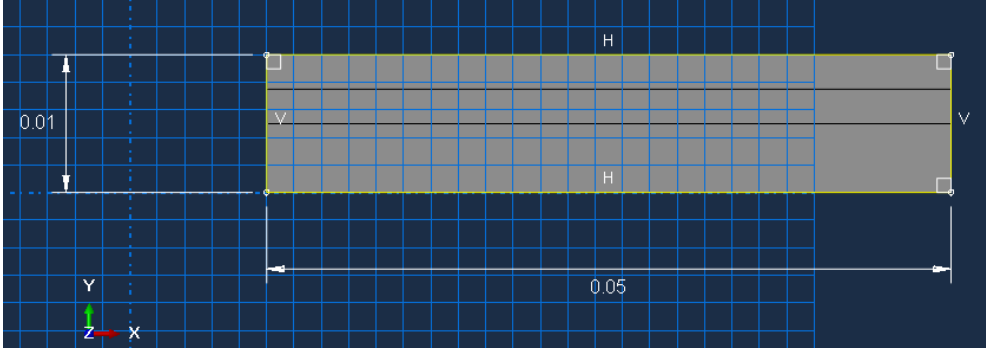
Sketch made on Abaqus of the workpiece. The dimensions are in millimeters.
